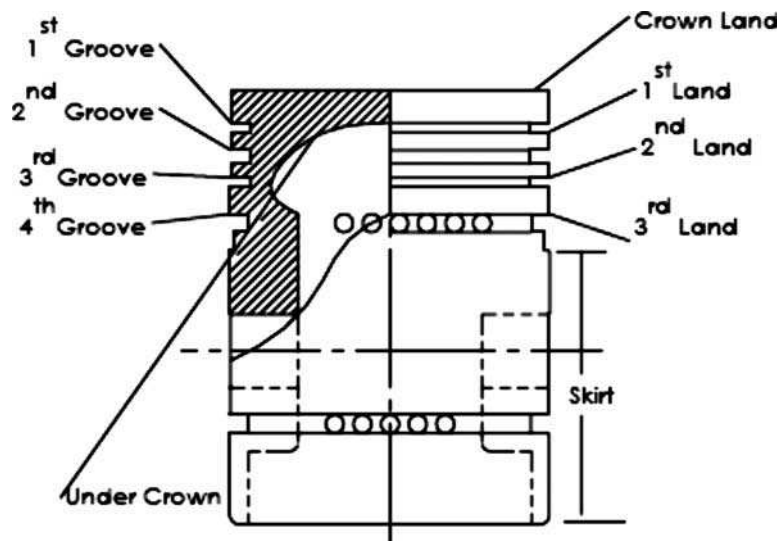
Nomenclature of various engine parts: used for piston rating.
